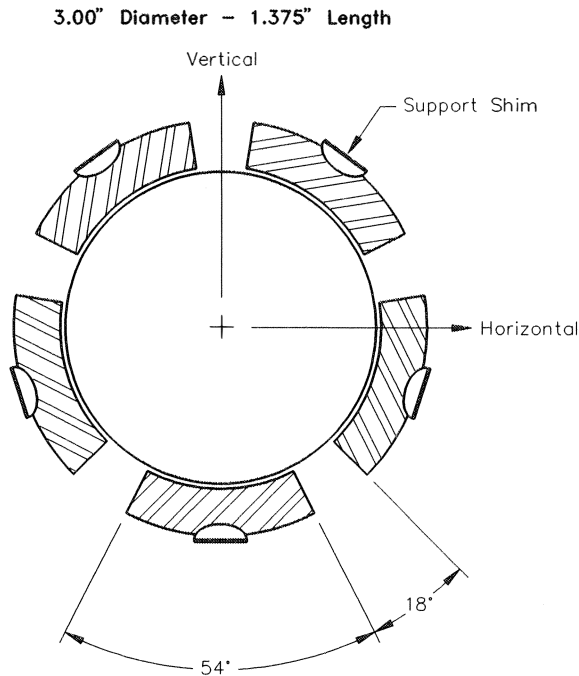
5 SLOP Tilt Pad Journal Bearing.
